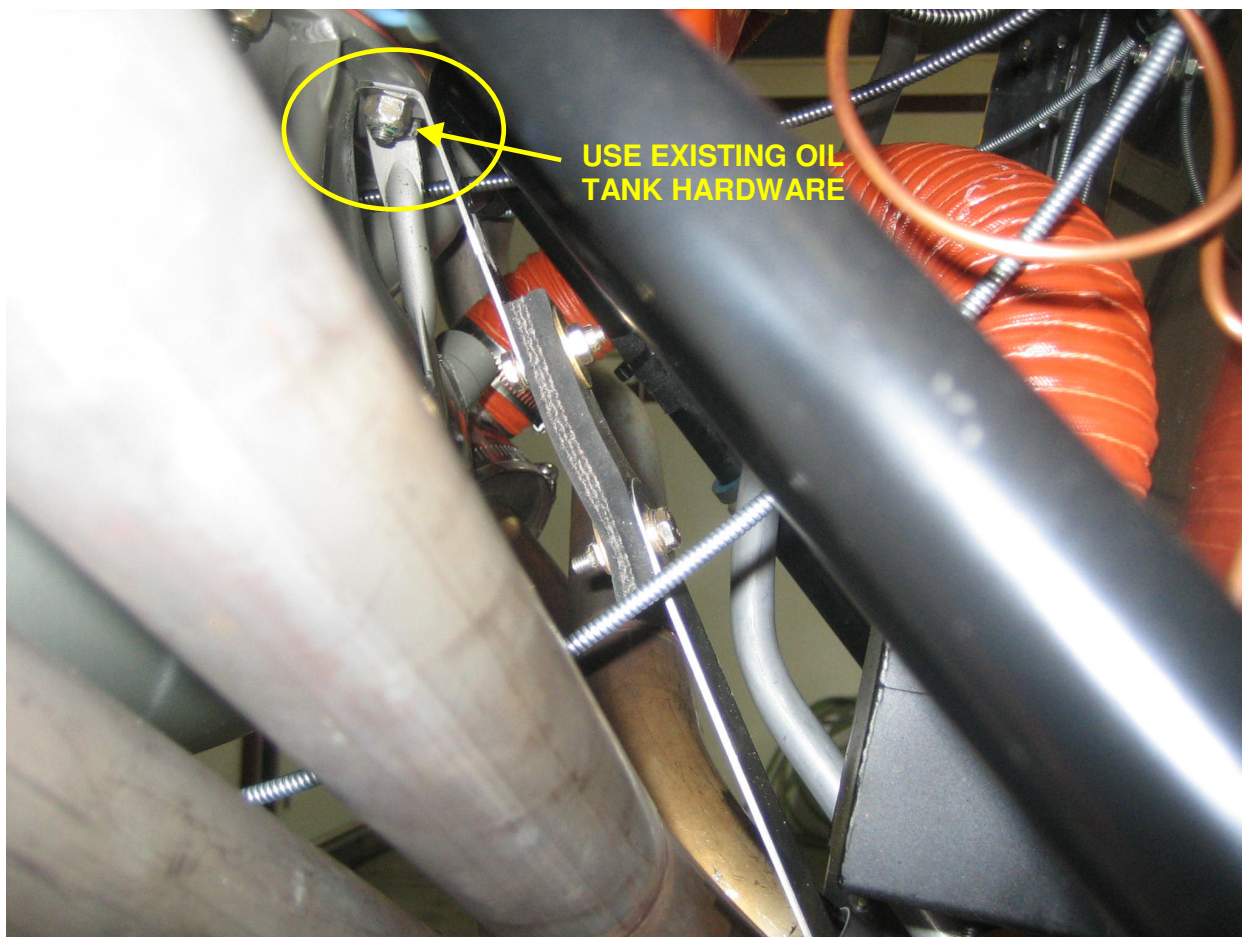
EXHAUST HANGER ATTACHMENT TO ENGINE
